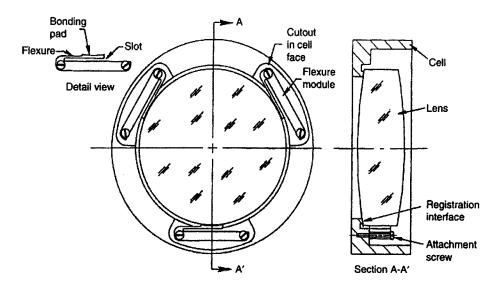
A mounting concept in which the rim of a lens is bonded to three removable flexure modules. (Adapted from Ahmad and Huse.²⁴)
